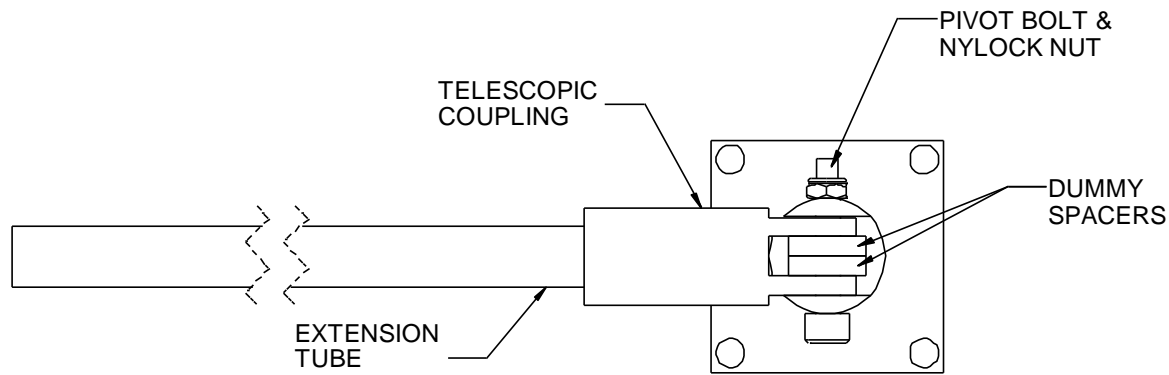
Connecting last set of Anchor Plate and Telescopic Coupling
